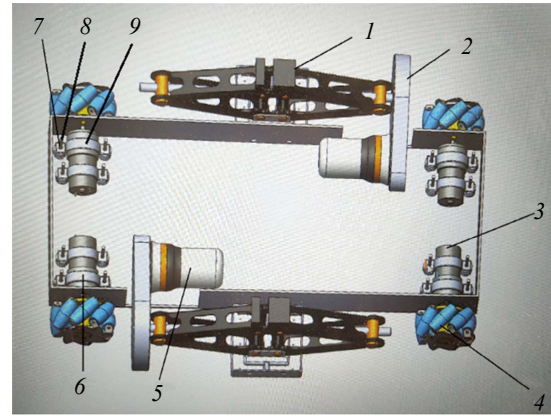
Main components used for the robot: 1 - jack; 2 - gearbox; 3 - DC motor; 4 - meconium wheel; 5 - DC motor for car jack; 6 - DC motor holder for robot; 7 - spring; 8 - hex bolt for holder; 9 - motor's holder
